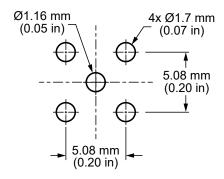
Recommended PCB Dimensions for the CONSMB001-G
